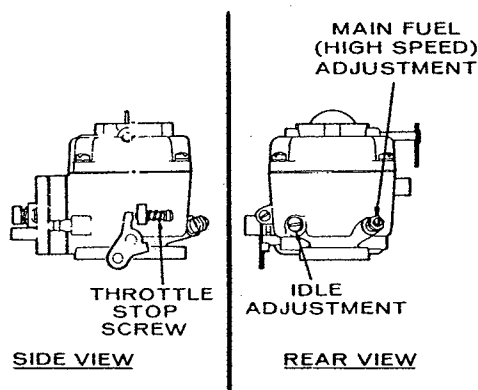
MAIN FUEL AND IDLE VALVE ADJUSTMENT
